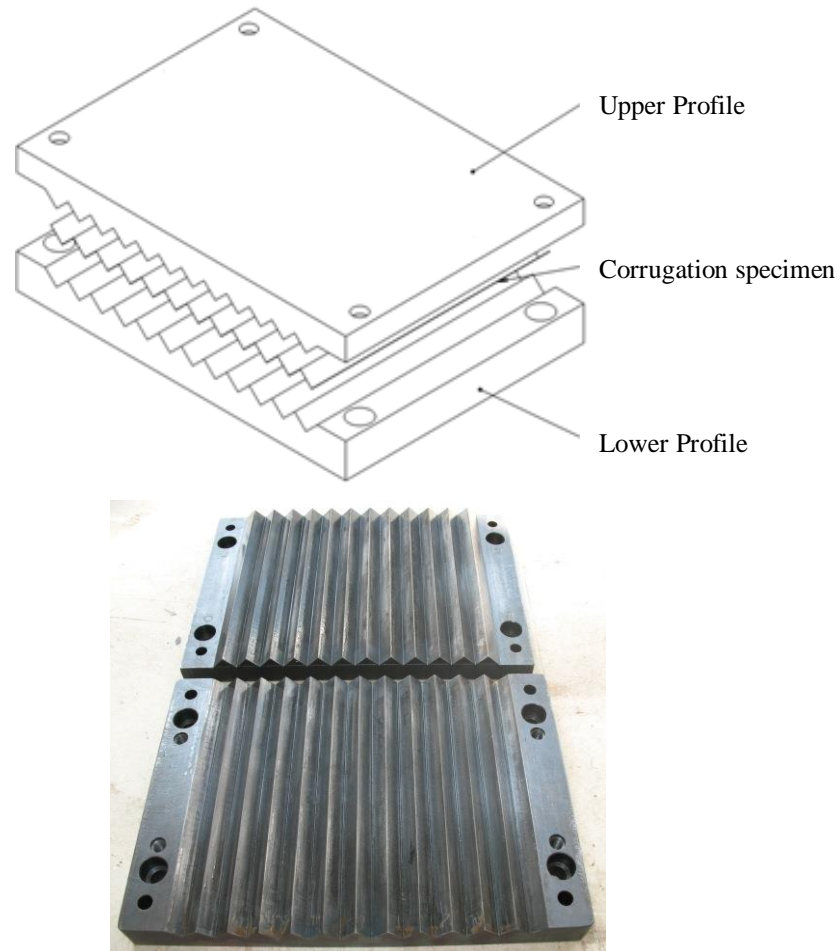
Assembly drawing and photograph of the corrugated mould.
